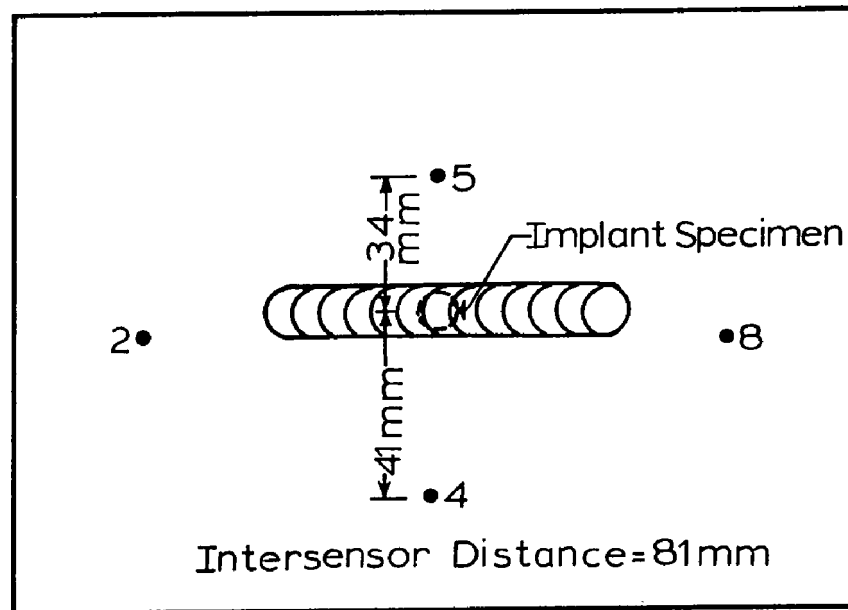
AE Sensor Position on the Base Plate with Respect to Weld and Implant Specimen.
